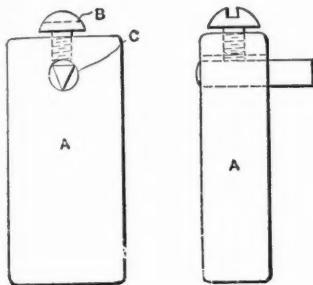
Tool for Cutting or Scraping the Edges of Thin Templets.
